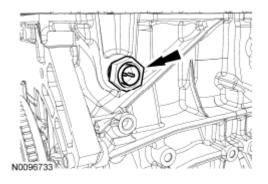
Locating Block Heater Courtesy of FORD MOTOR CO.
